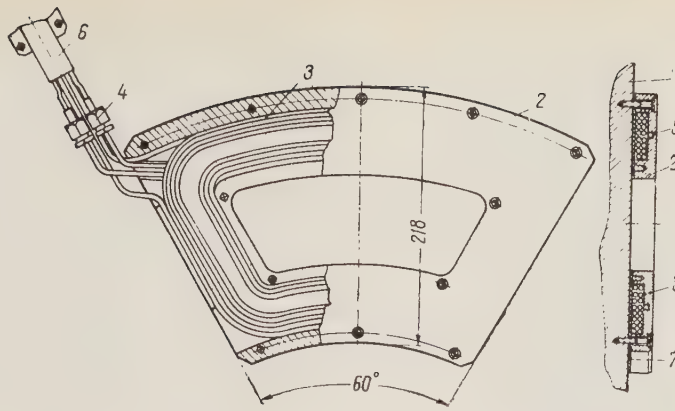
Correcting coils in the gaps. 1) Accelerating chamber cover; 2) coil form; 3) coil; 4) detachable vacuum coupling; 5) water-cooling tube for coil form; 6) copper shield; 7) coil form cover.
